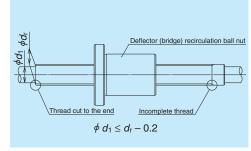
Shaft end of a deflector (bridge) recirculation system ball screw
